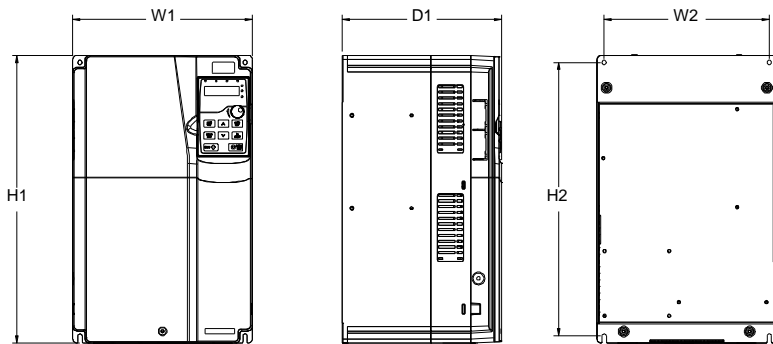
Wall mounting for 380V 30–37kW VFD models
